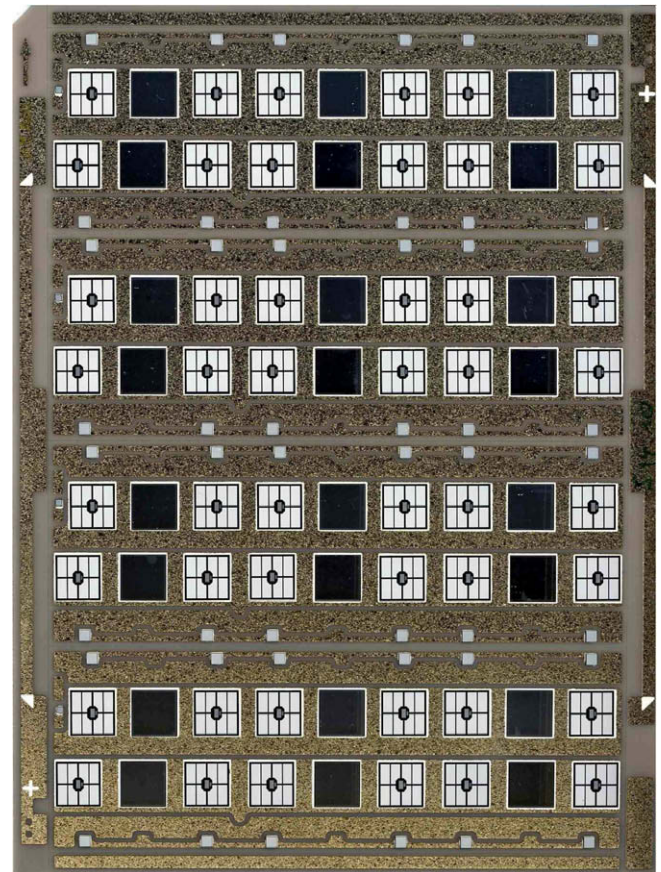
Ceramic substrate 5 in. × 7 in. master card after the diffusion sinter process – 120 chips are assembled in a single process step.
